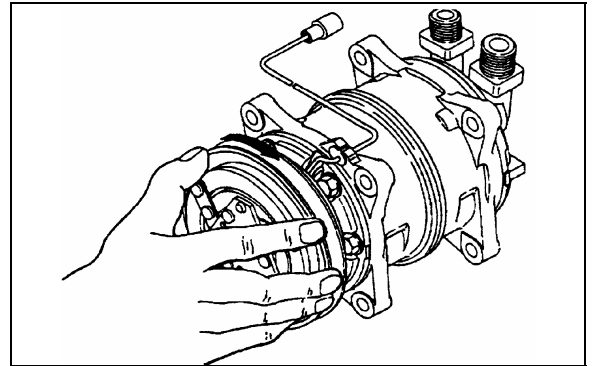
ROTATING MAGNETIC CLUTCH 22253
